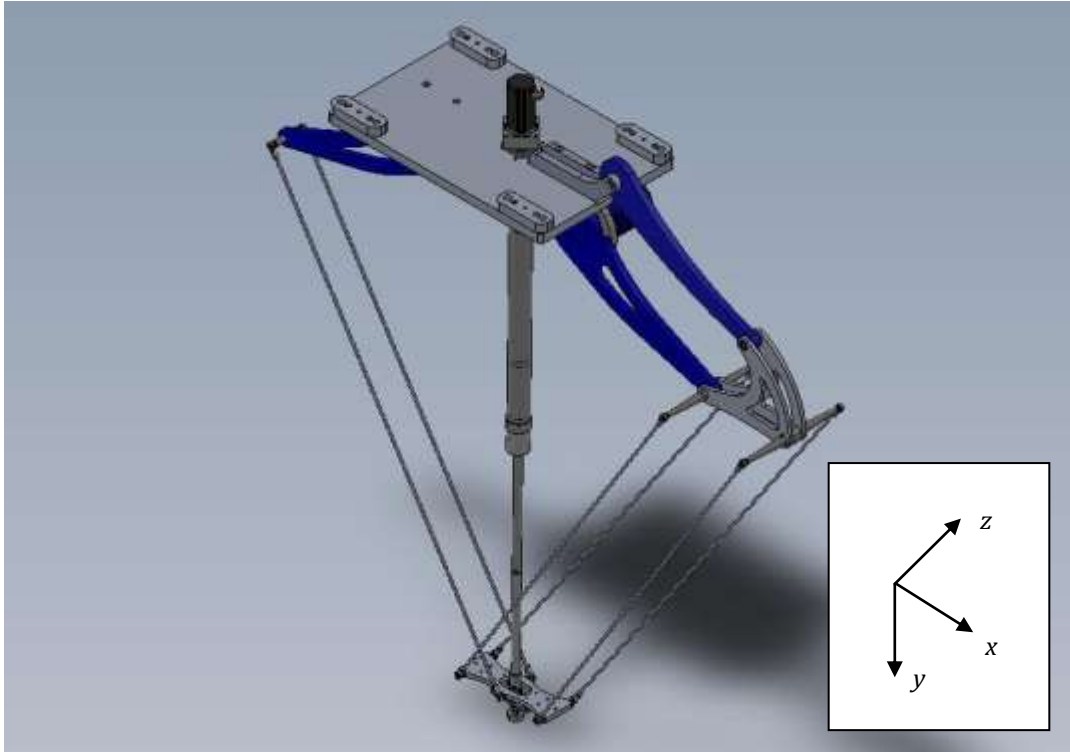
CAD Model of the Mechanical Design (Isometric View)
